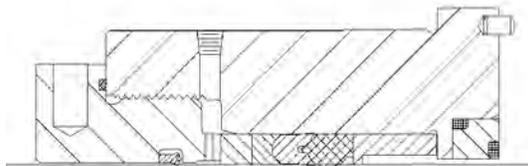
TYPICAL PACKING ASSEMBLY
